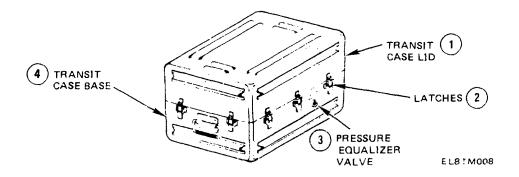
Unpacking Electronics Assembly, Control Panel, or Technical Manual.
